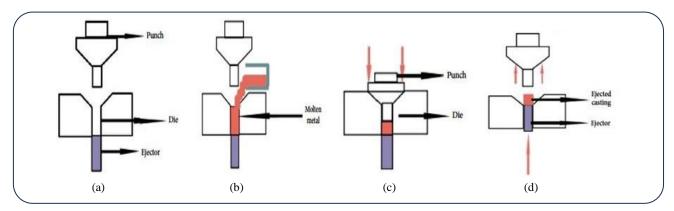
Squeeze casting process (a) 1st step, preheat the die set (b) 2nd step, pouring the molten metal into die cavity (c) 3rd step, solidify molten metal under pressure and (d) 4th step, ejection of casting [60].
